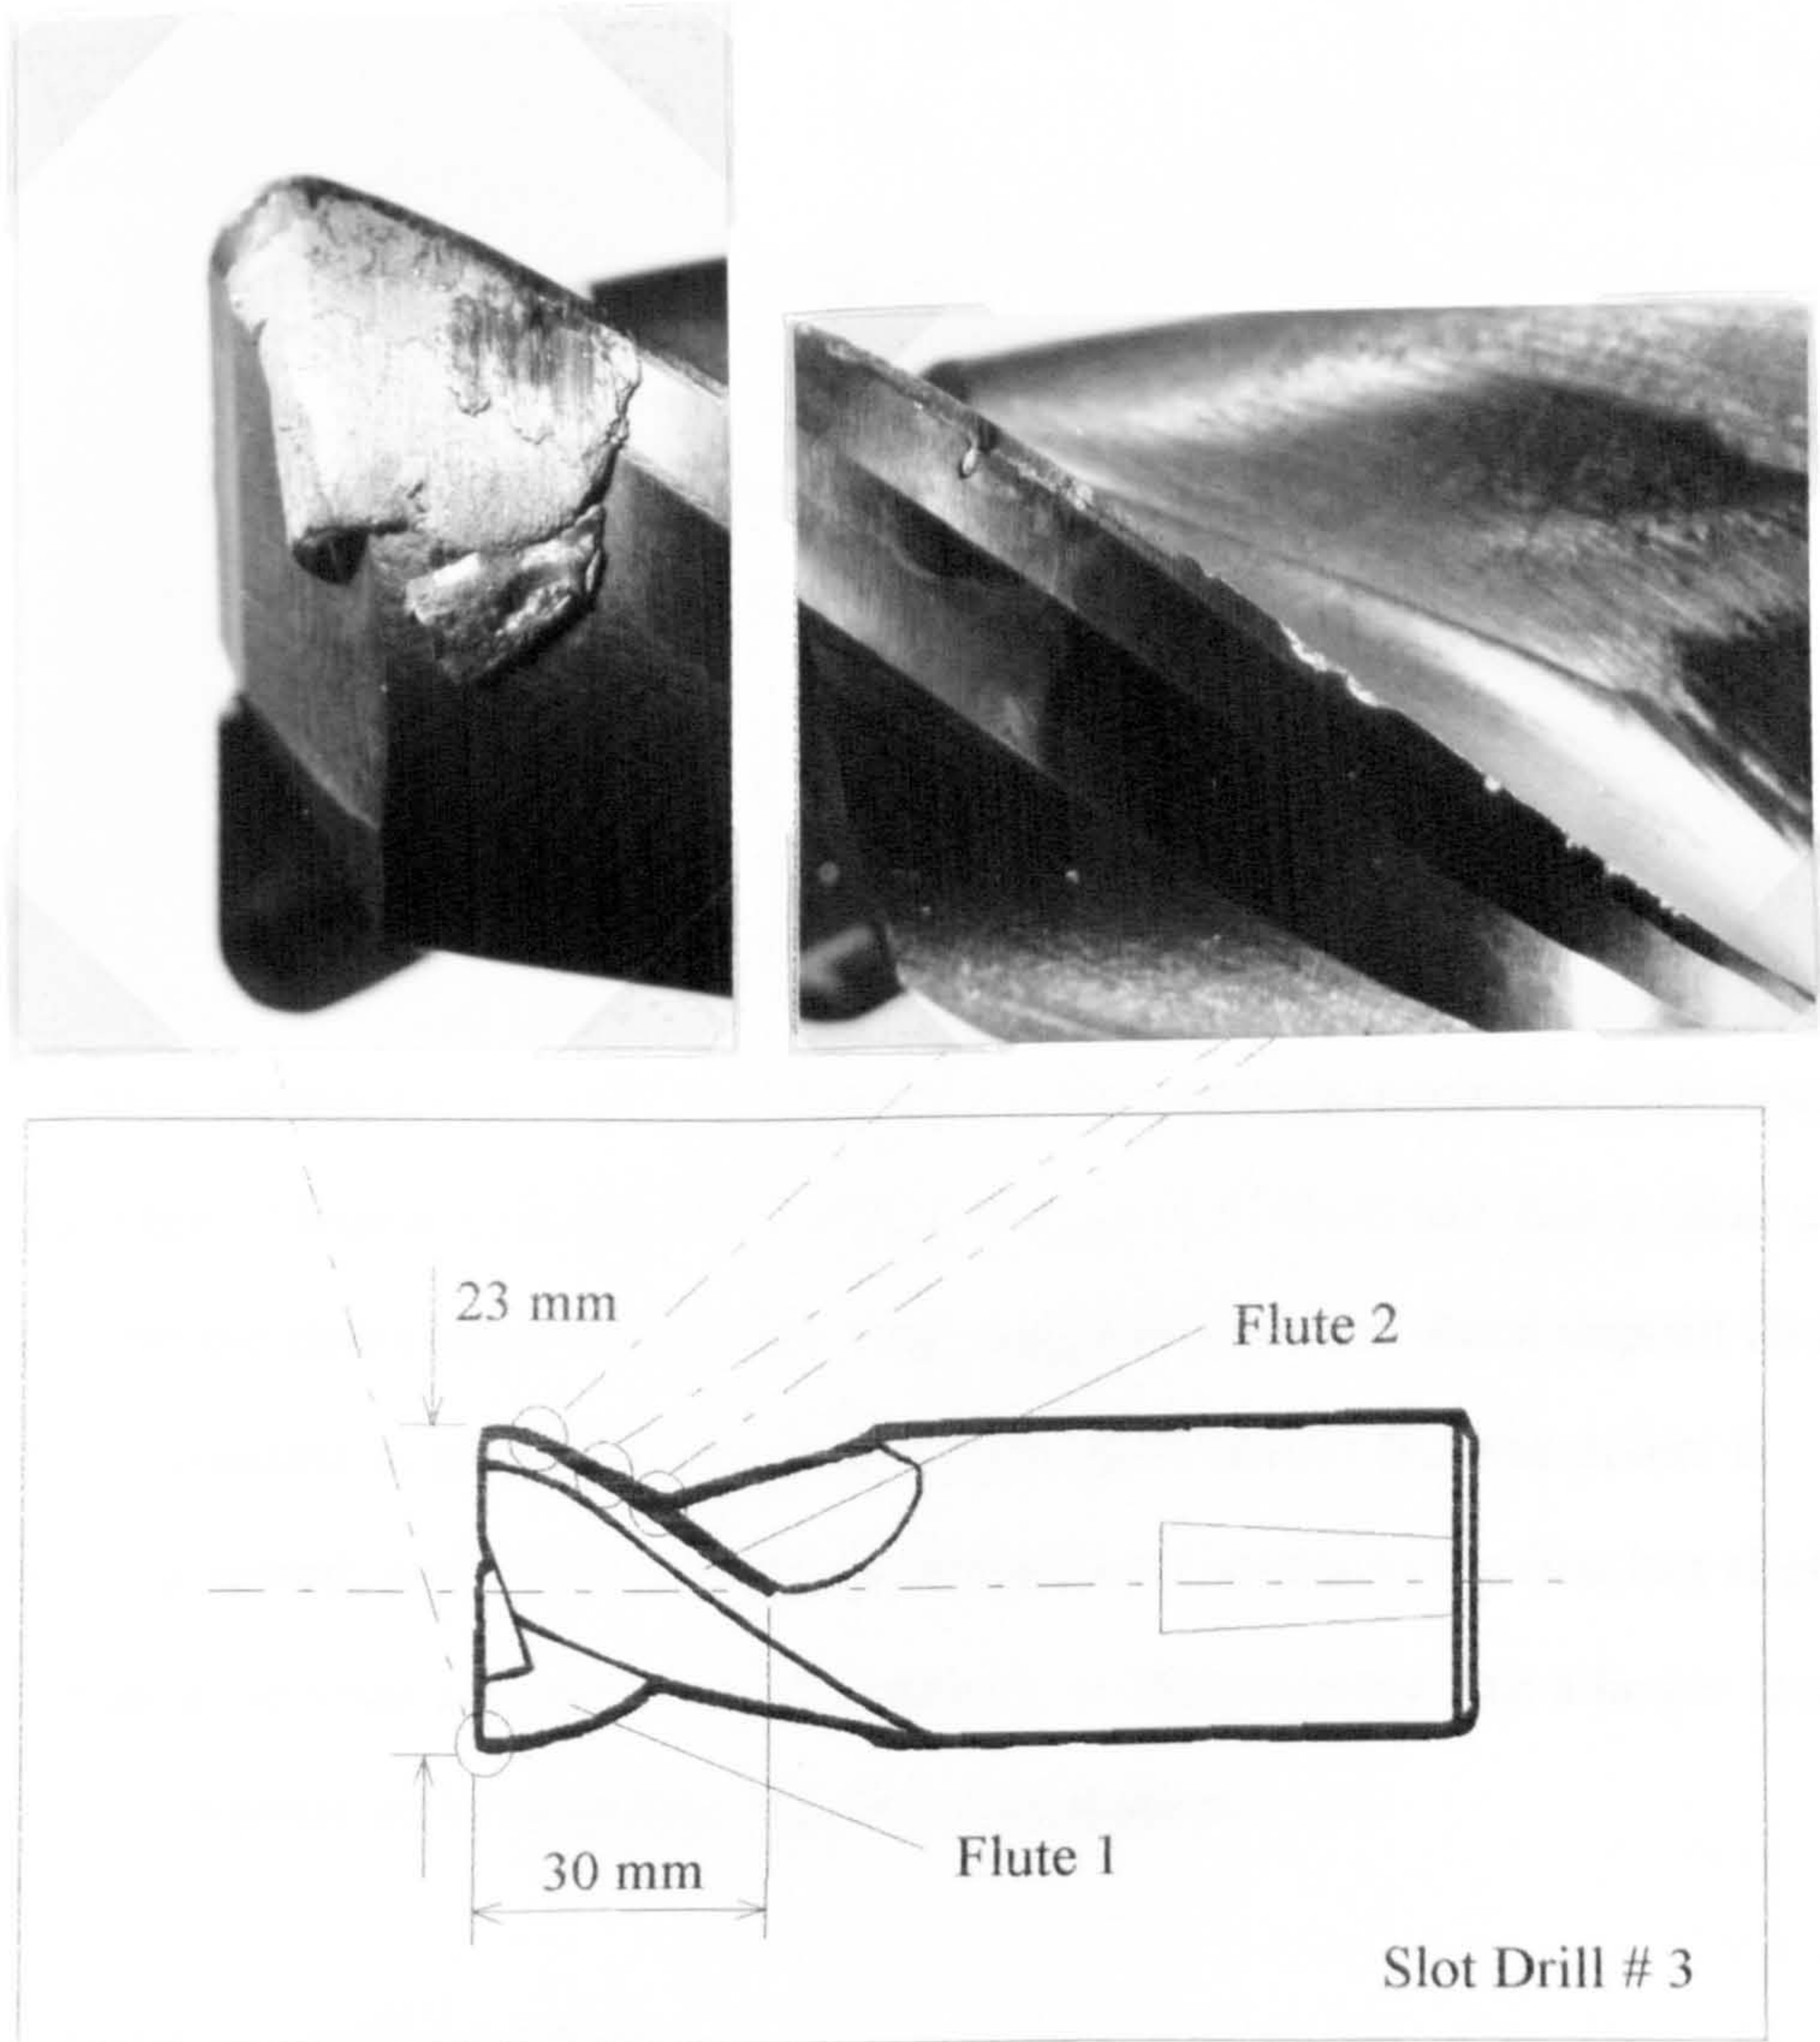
Cutting tool 3 showing defects and defect locations
